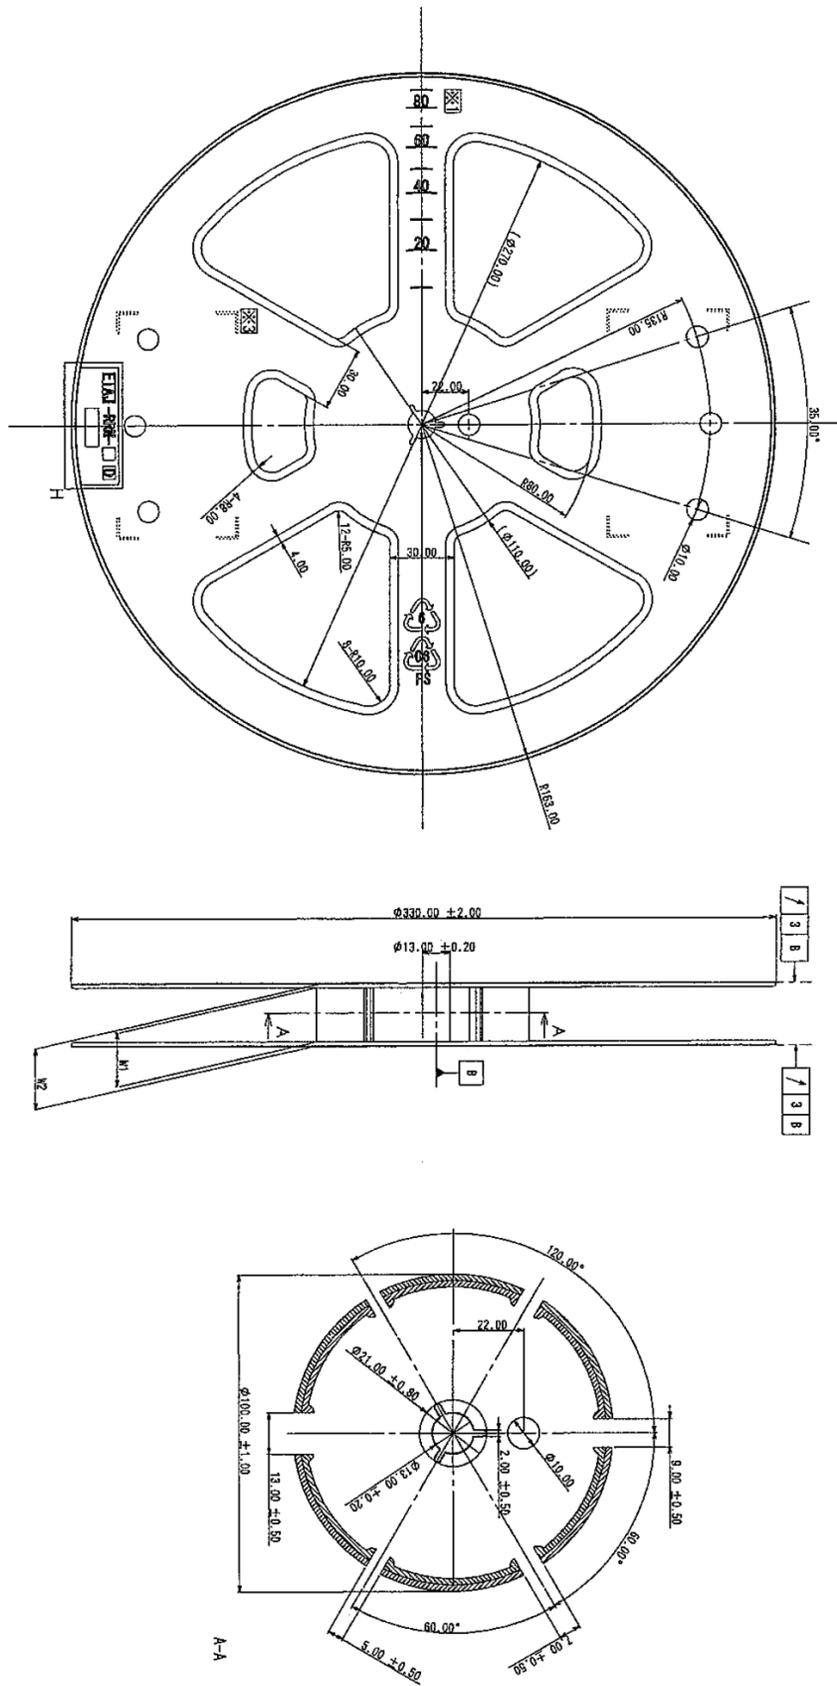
Packaging Reel Dimensions (Unit: mm)
